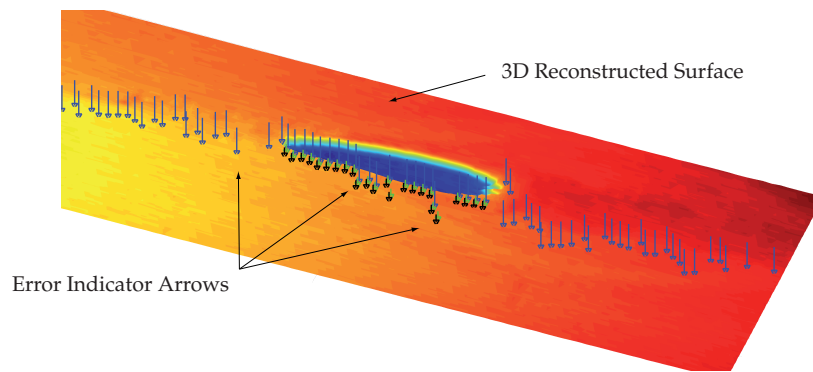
3D representation of the inspected weld with error indicating arrows.
